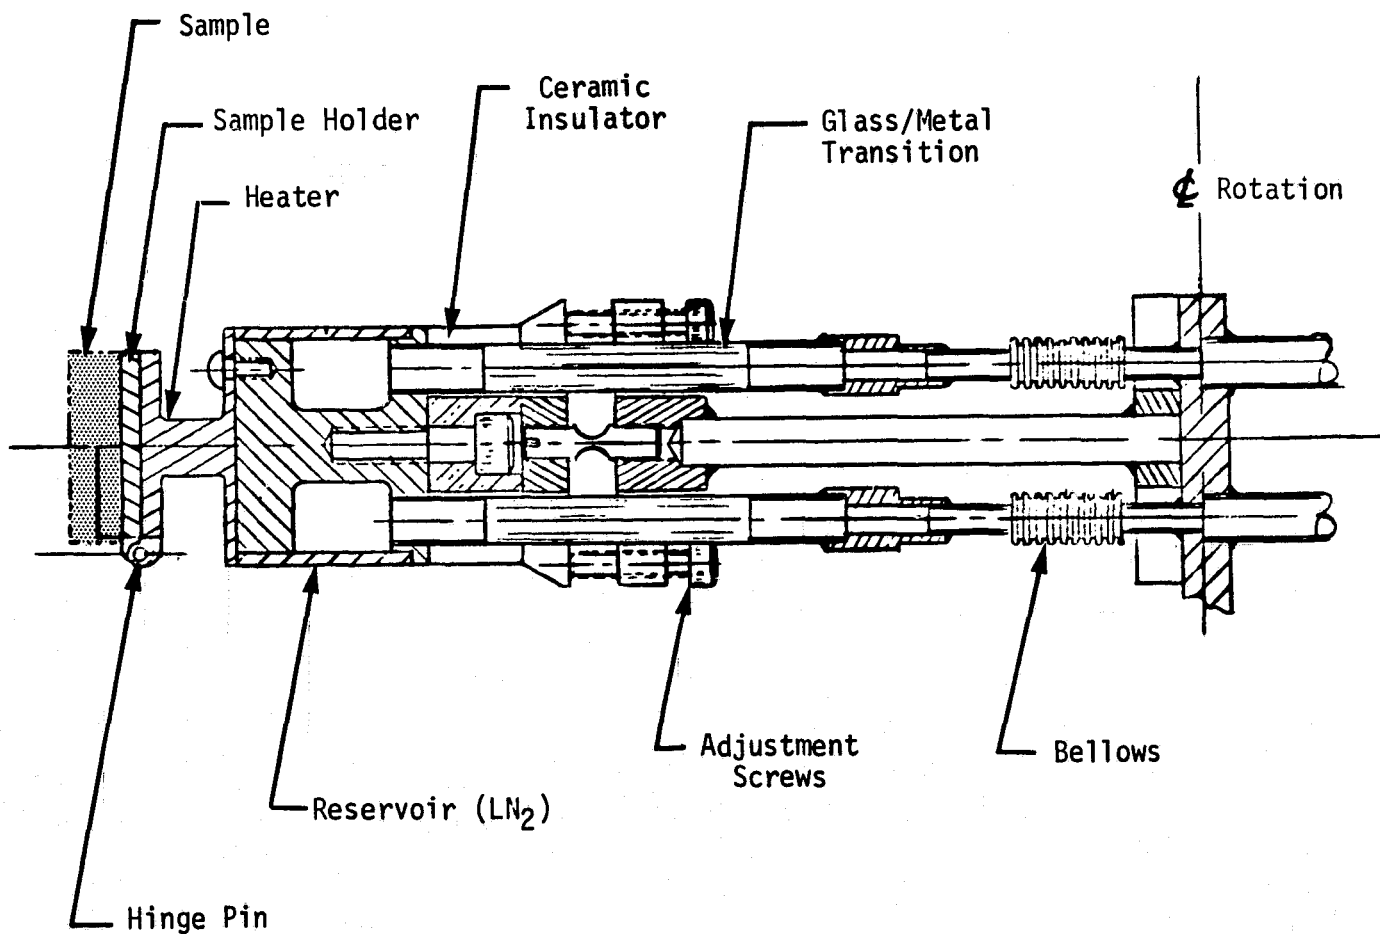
DETAIL OF SAMPLE HOLDER ASSEMBLY
